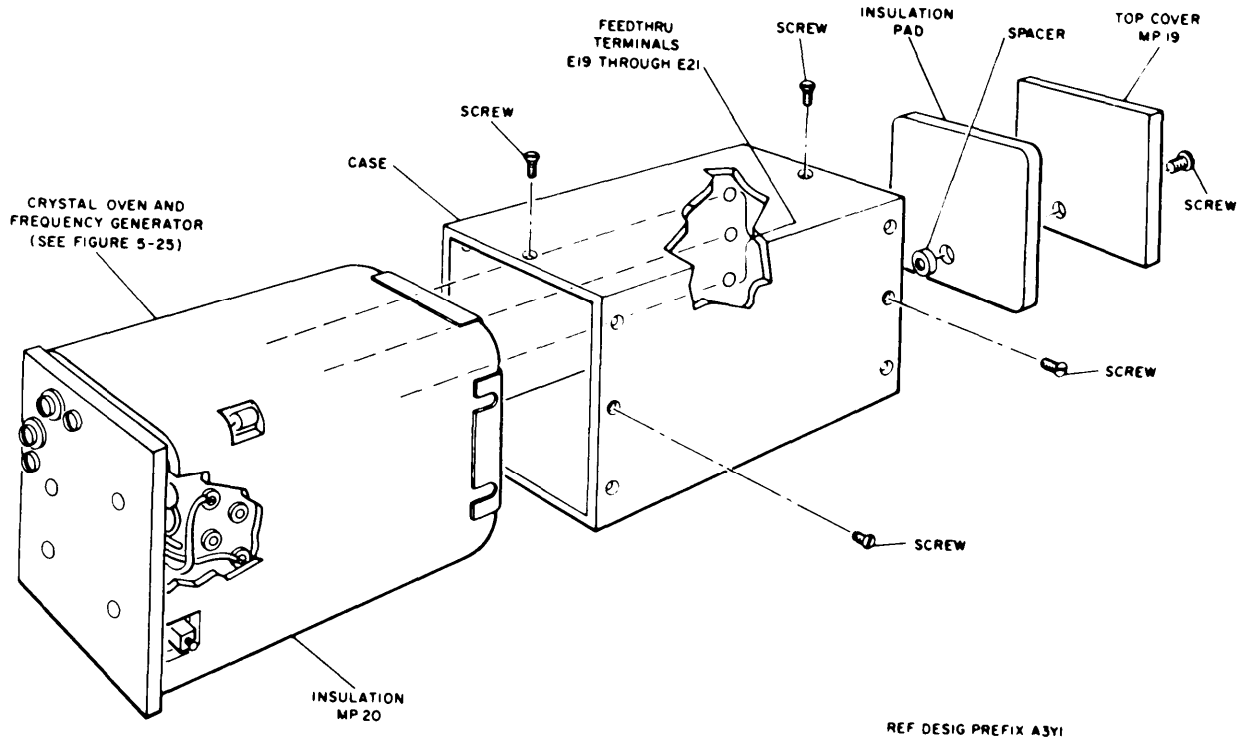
Disassembly of 1-MC Oscillator A3Y1
